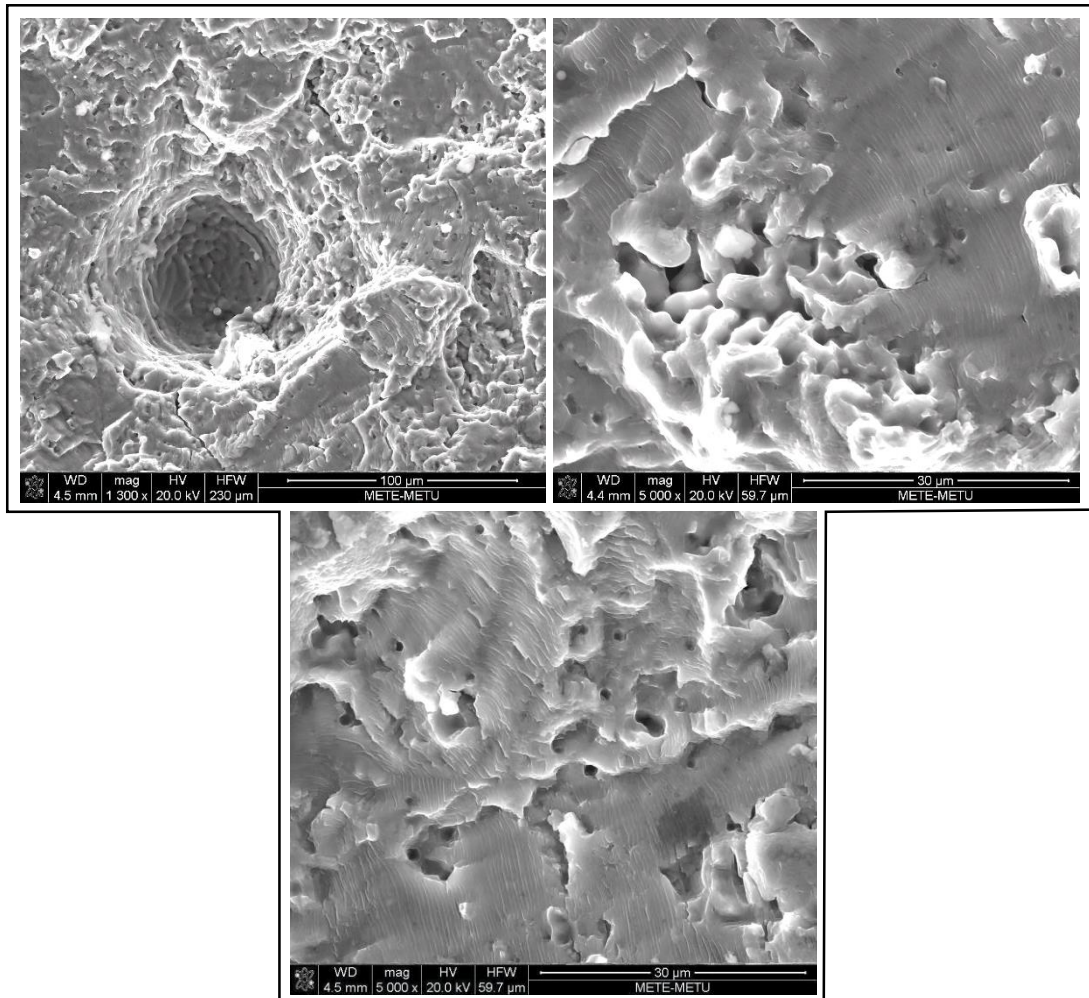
Welding defects found on the fracture surfaces of the compact tension samples.
